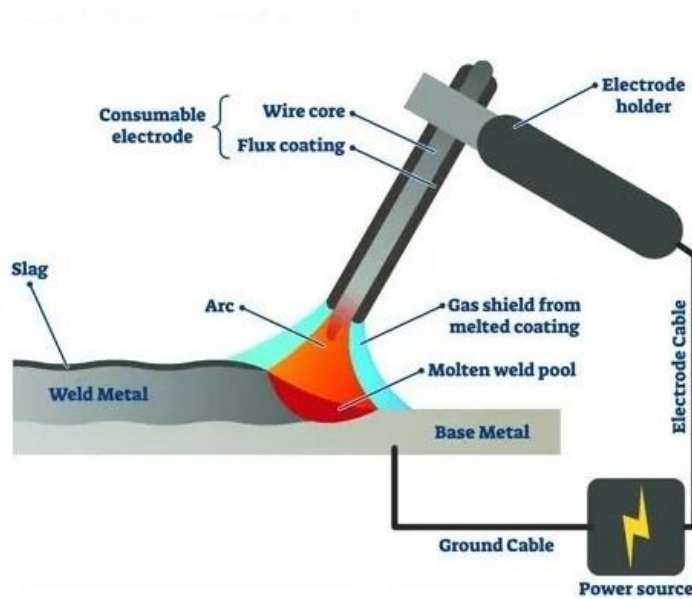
Structure of Stick Welding Method (fractory.com, 2023).
